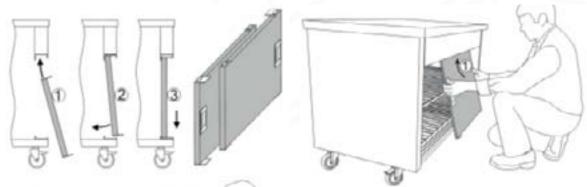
demonstrates the fitting of the cupboard doors; in this case, the rear door (Door A).
